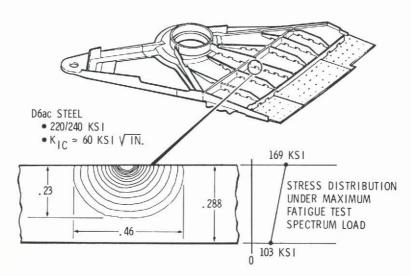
, - Sketch of fatigue crack in aircraft wing pivot fitting (ref. 2).
